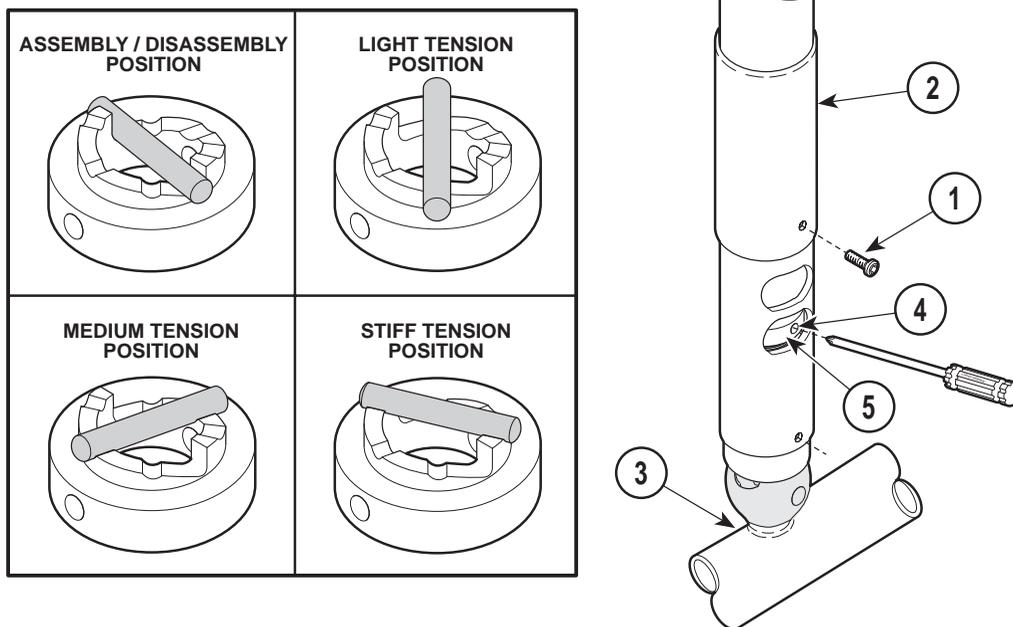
BALL PIVOT TENSION ADJUSTMENT
